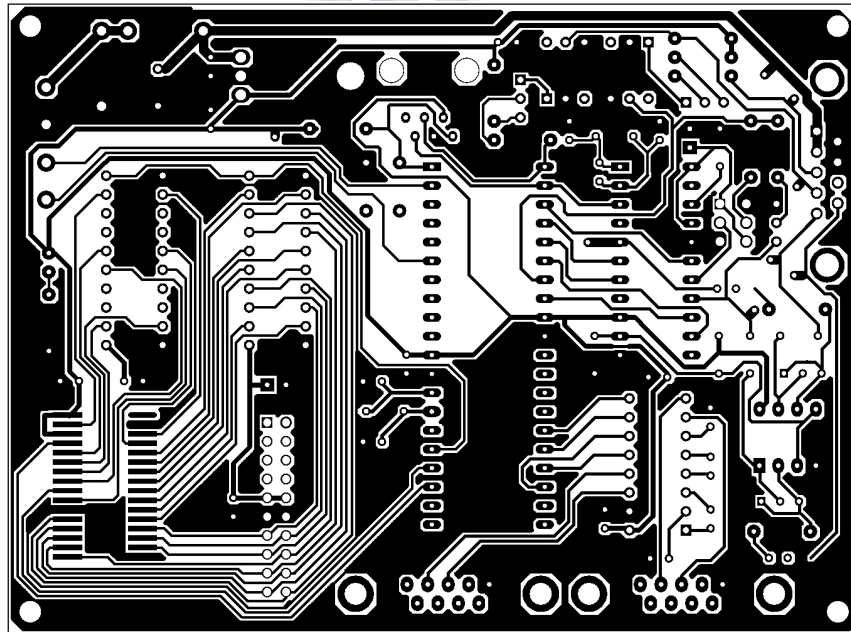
RTU PCB Bottom View, Scale 1:1.
